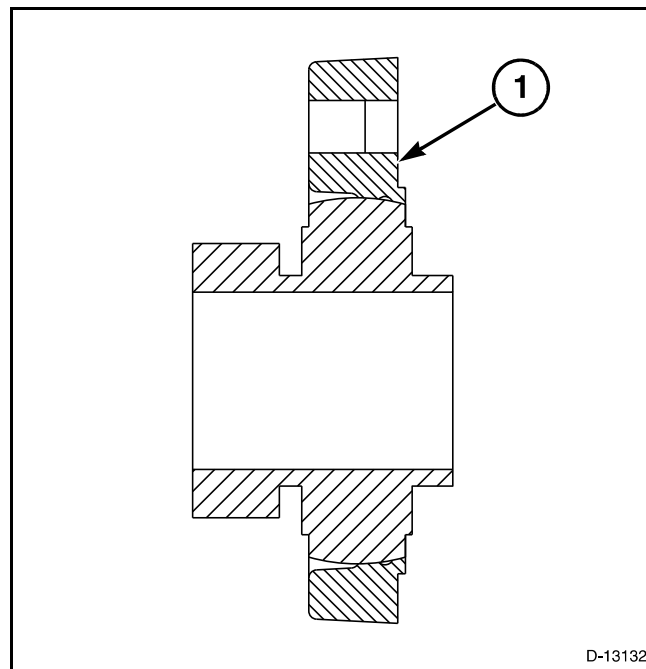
Inspect bearing housing (1) for cracks. Replace the bearing housing if broken.
